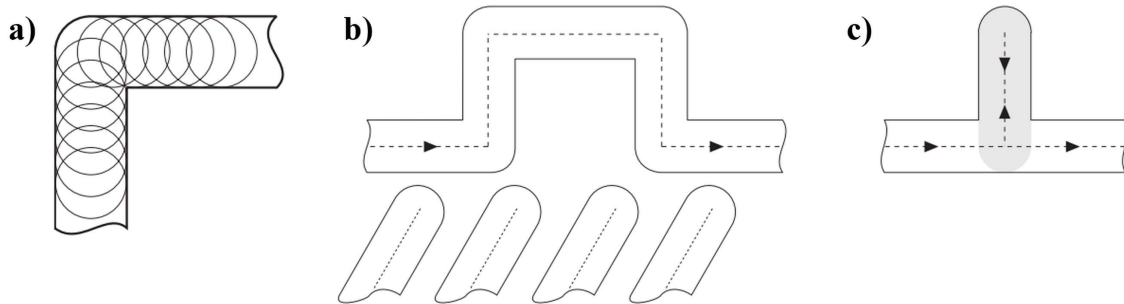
Fused deposition modelling: a) Corner detail, b) Intricate geometry detail, c) Fine web detail [55]
